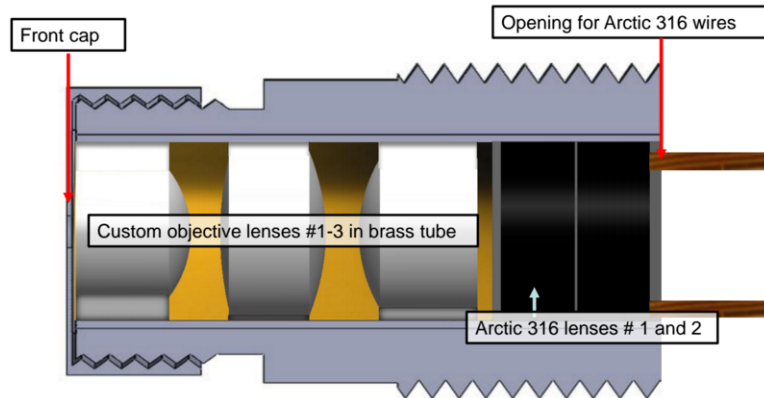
A cross sectional view of the threaded objective holder, which contains three PMMA singlet aspheric lenses and two Arctic316 electrowetted lenses.
